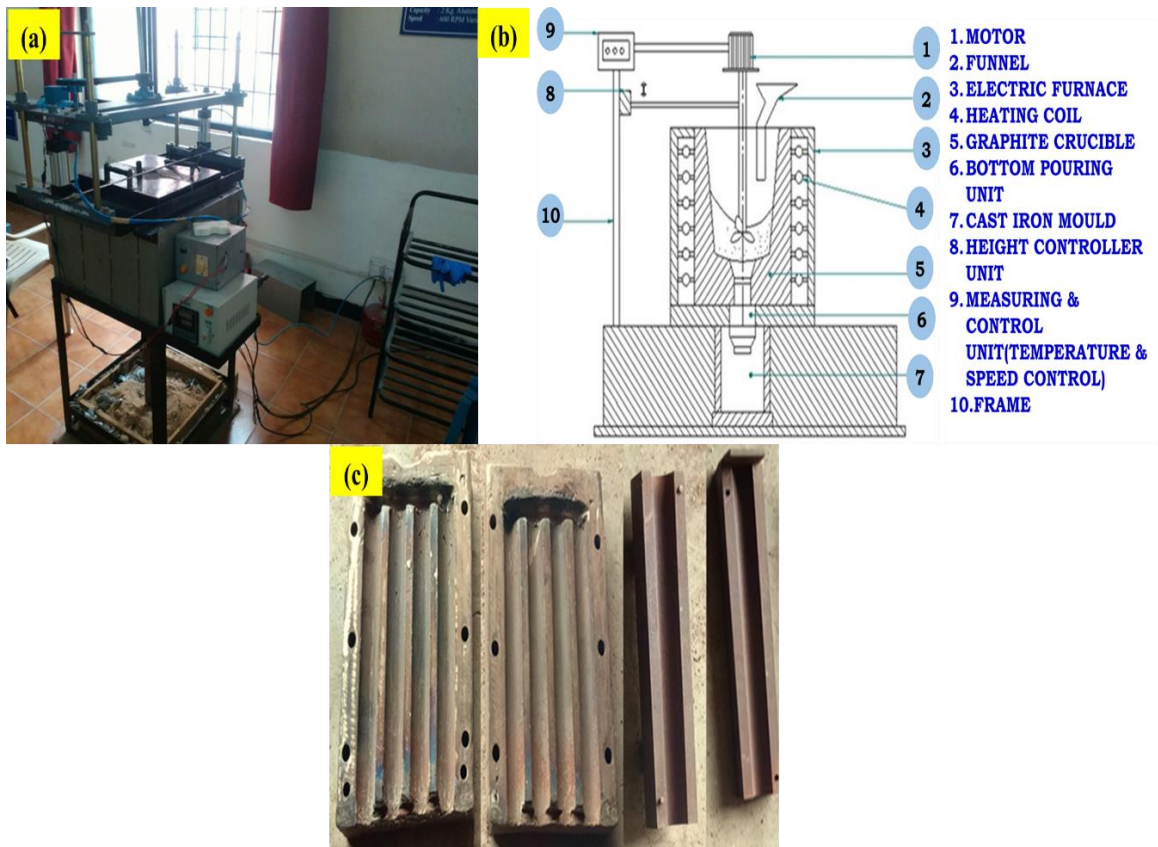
Details of fabrication of A357-DPS composites. Where (a) Stir casting set up (bottom pouring technique), (b) Line diagram of stir casting setup, and (c) Cast iron permanent mould.
